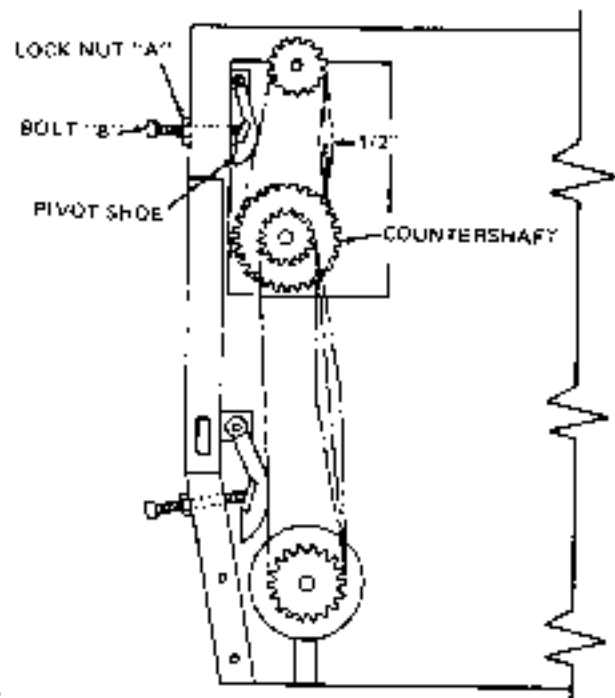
Feeder Countershaft Drive Chain Adjustment
